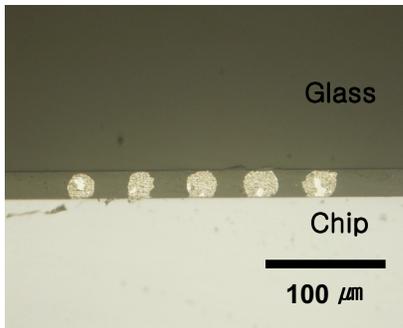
Optical image showing the solder joints of 50 μm pitch.
